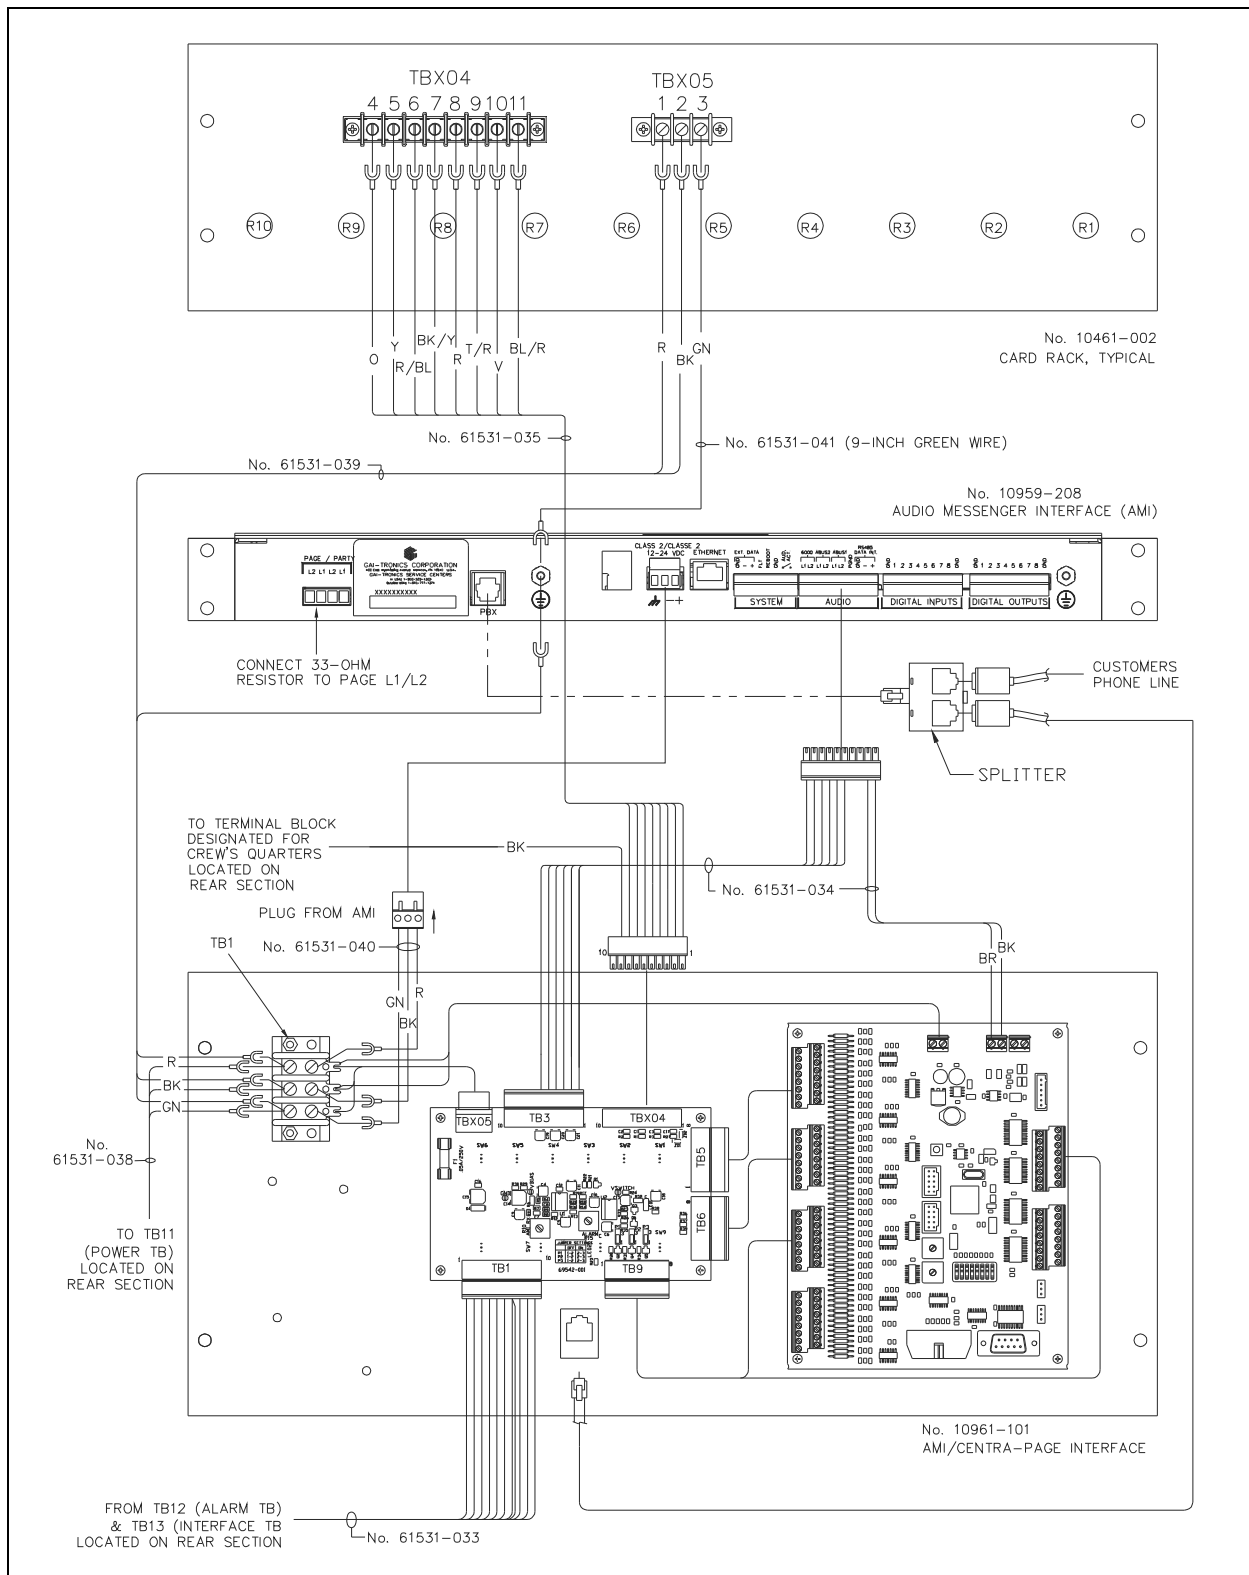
Terminal block connections on the rear of the central cabinet's center section (shown fully-loaded for clarity)
